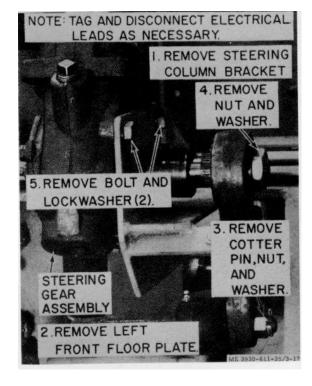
Pitman arm and steering gear assembly, removal and installation.
